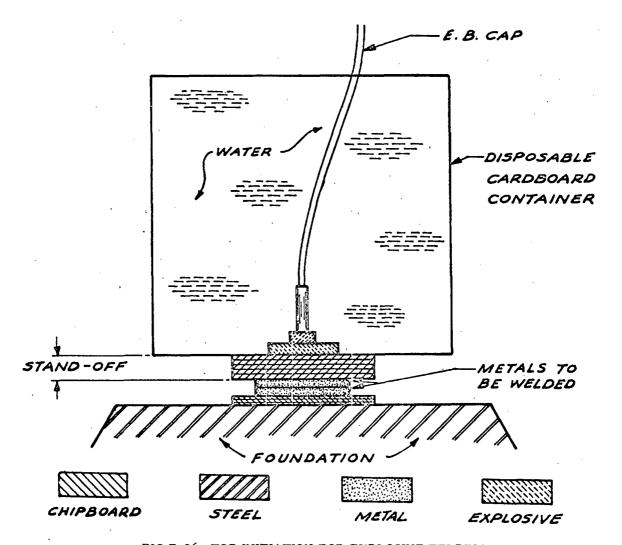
TOP INITIATION FOR EXPLOSIVE WELDING
